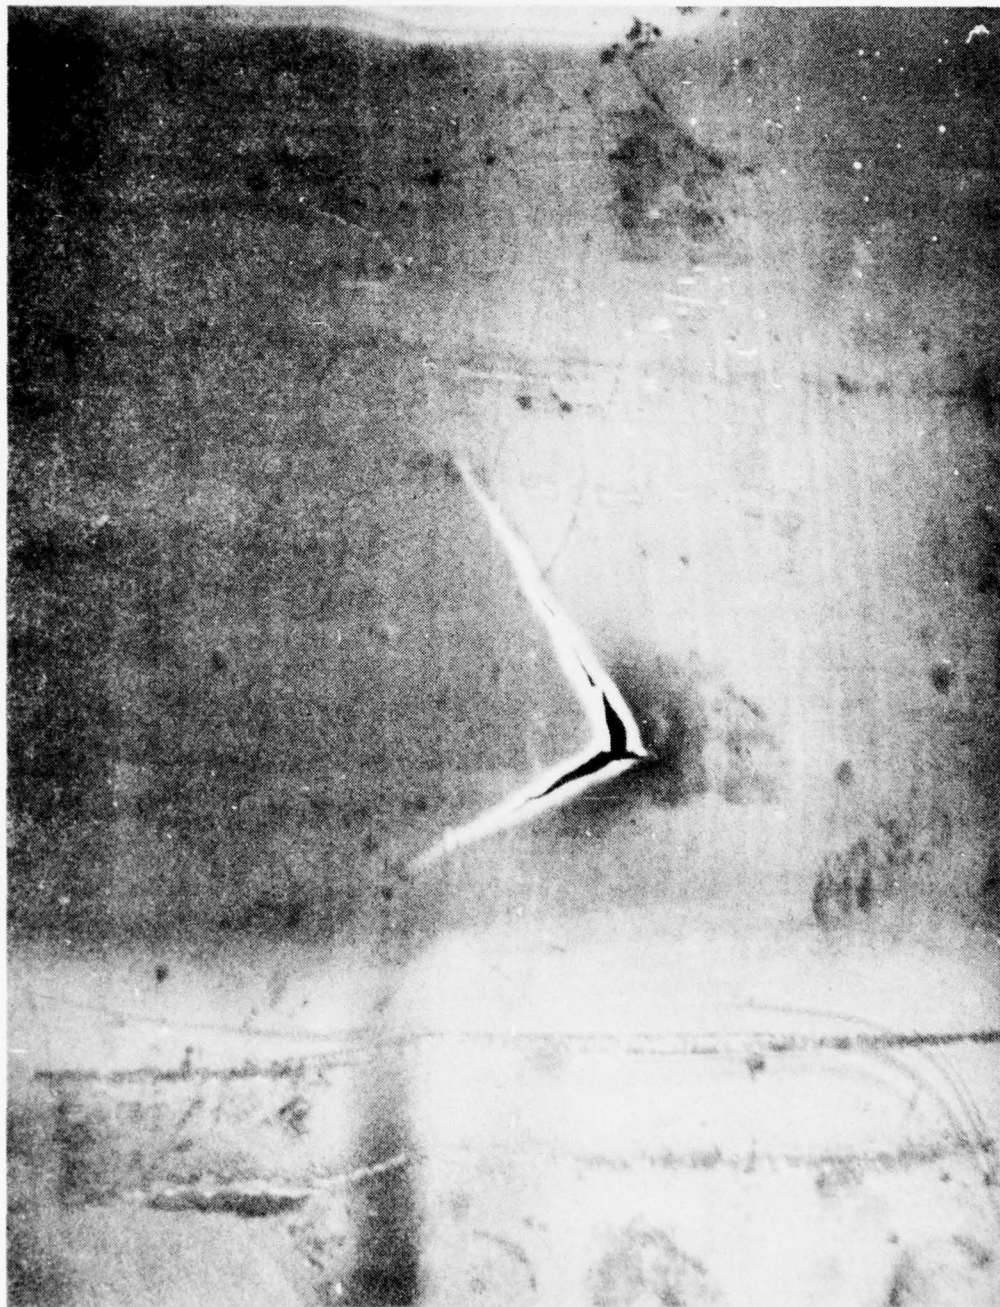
Test No. 18, 0.25-in. Thick Mild Steel Target — Back
